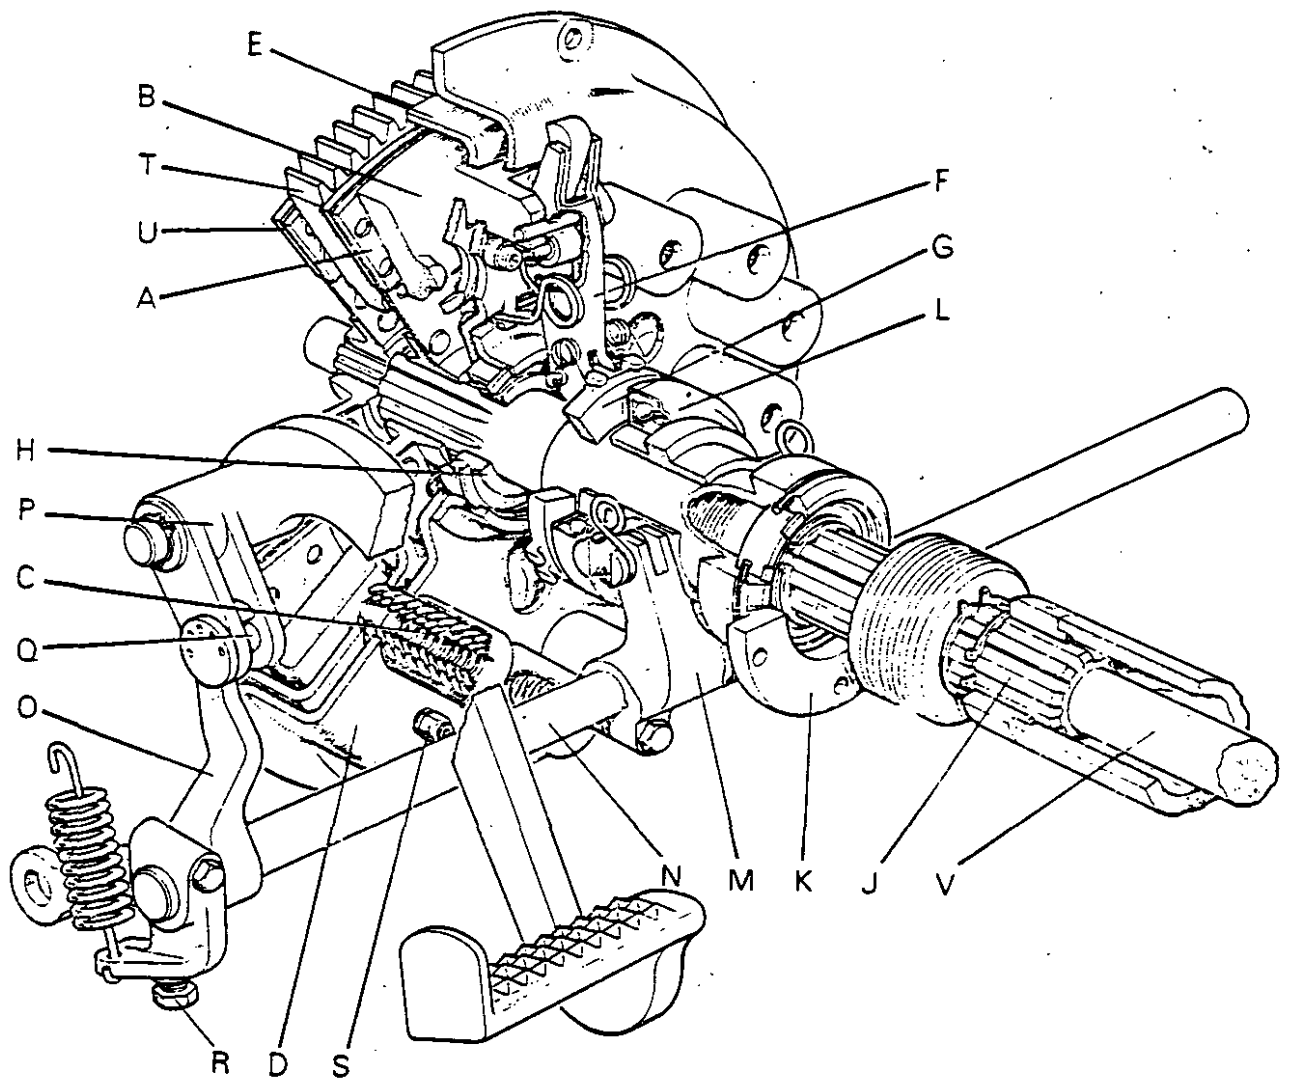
DOUBLE CLUTCH — 880/4600/990 LIVEDRIVE TRACTORS
